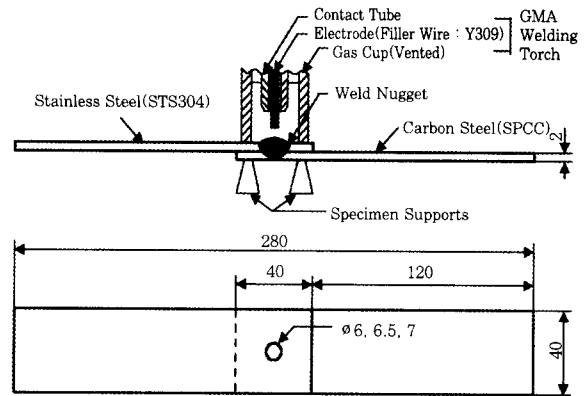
Specimen configuration and welding setup for arc spot welding process
